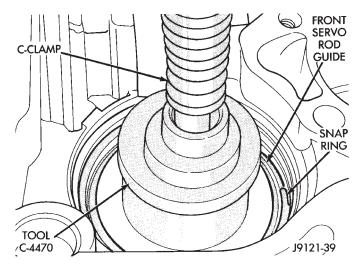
Removing Front Servo Retaining Snap Ring—46RH
